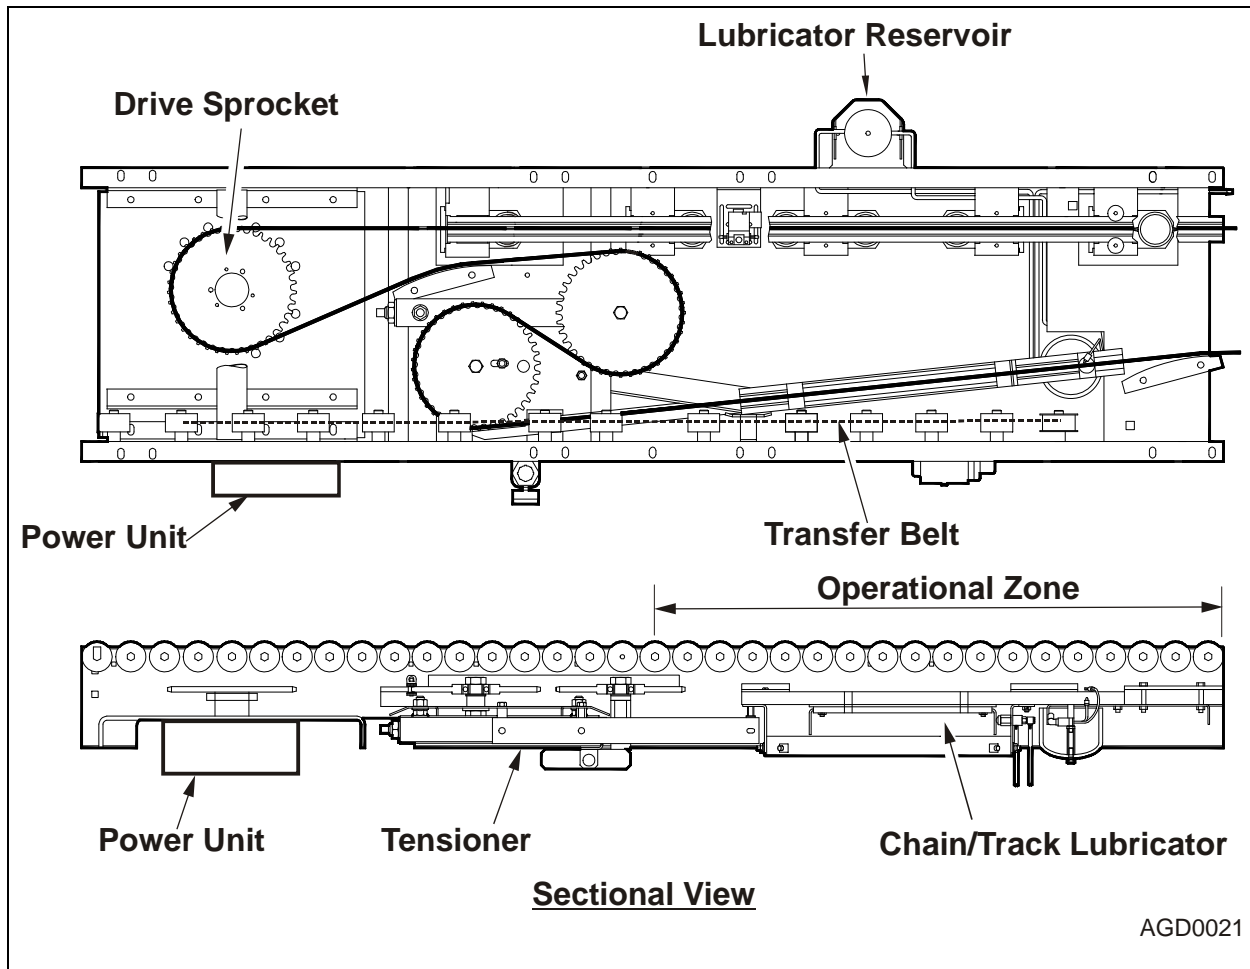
1 Accuglide Drive Section - Direct (Left-Hand Assembly Shown)
